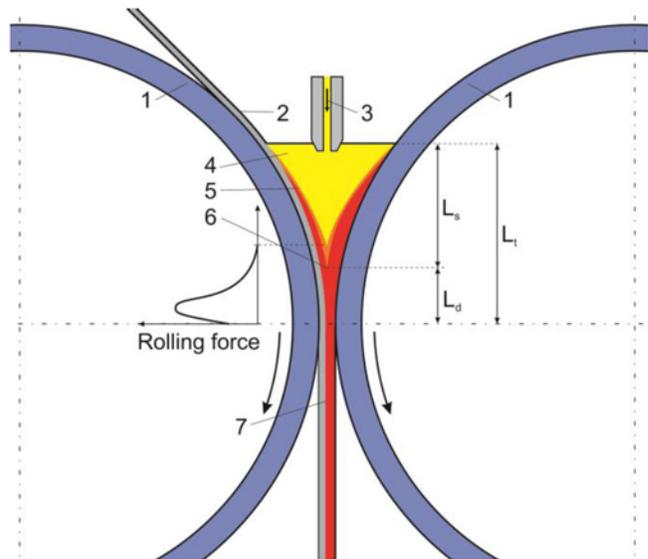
Basic schematic of the twin-roll casting of aluminum-steel clad strips: 1 – water-cooled rolls sleeves, 2 – steel strip, 3 – melt feeding system, 4 – aluminum melt, 5 – semi-solid metal, 6 – kissing point, 7 – clad strip; L_s – solidification zone length, L_d – deformation zone length, L_t – total length of the strip formation zone.
